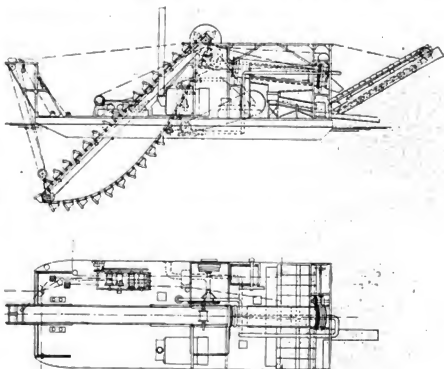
Sectional Views of a Prospecting Gold Dredge.
